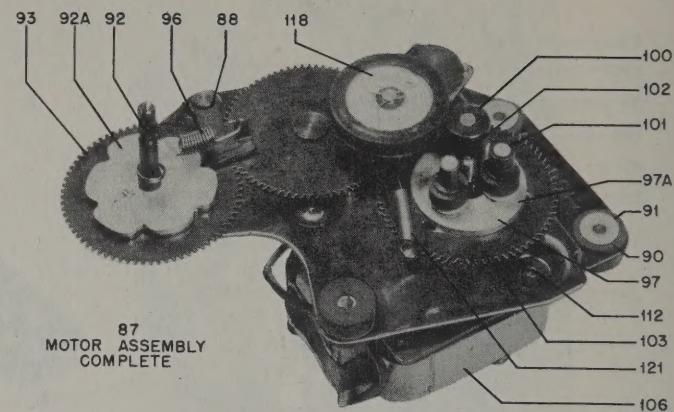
MOTOR & SPEED CHANGING ASSEMBLY
